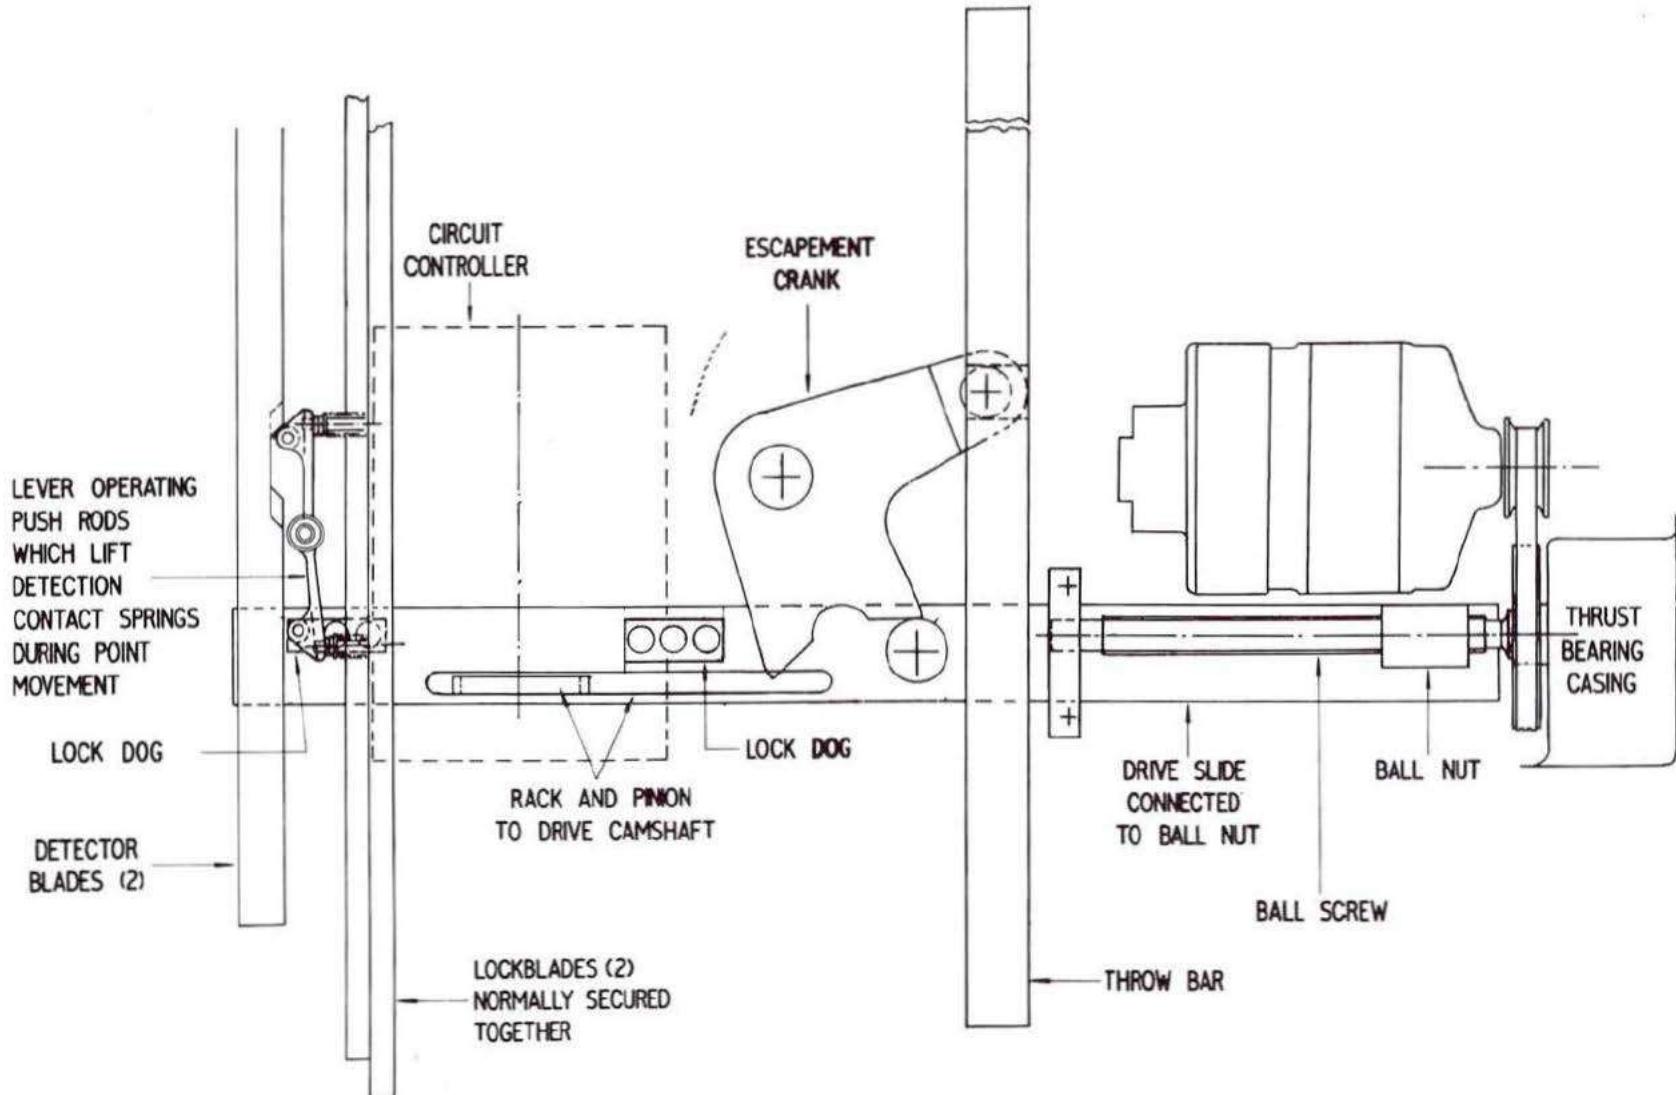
14 Point machine drive and lock movement: 'straight through'
